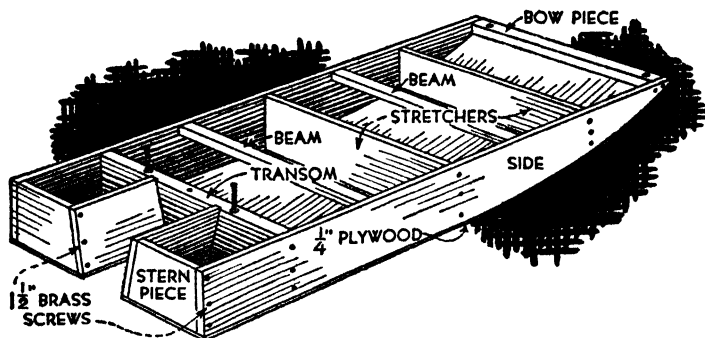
DETAIL OF SKIBOARD ASSEMBLY
